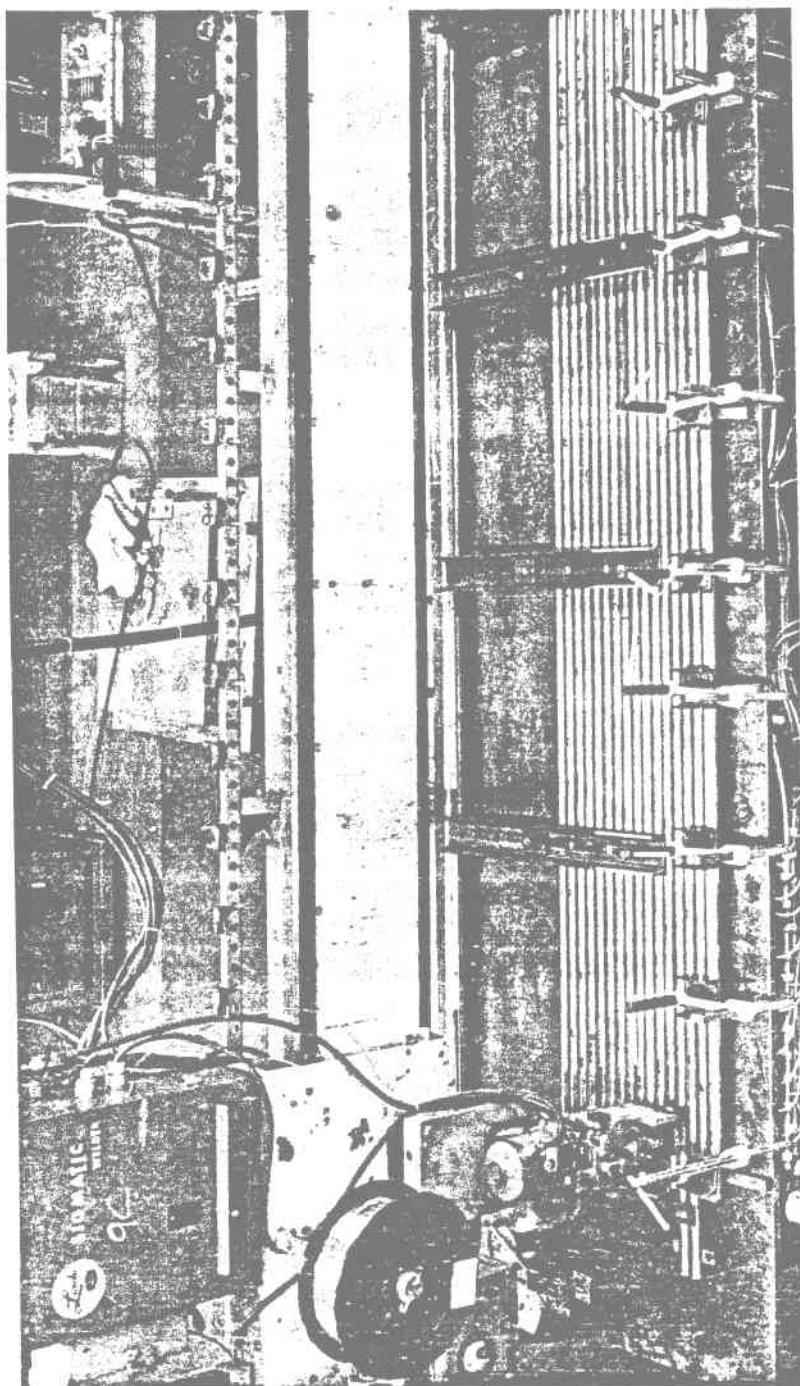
Welding of Four-Tube Subassembly to In-Process Panel
